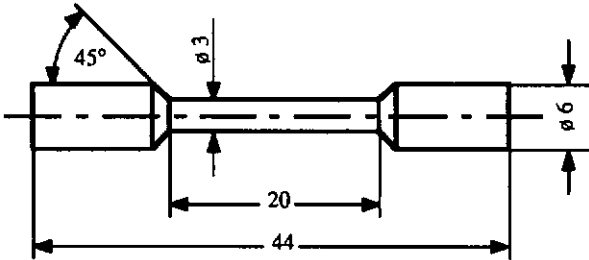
Tensile sample for high temperature testing. (Dimensions in mm)
